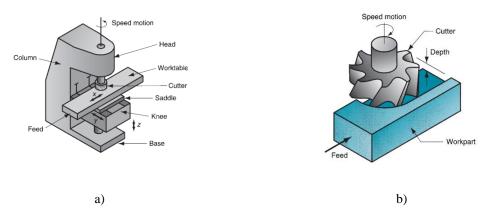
Milling illustrations a) Milling machine ,b) Mill illustrative operation
